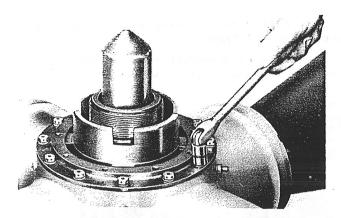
Removing Master Gear Retaining Plate Bolts
